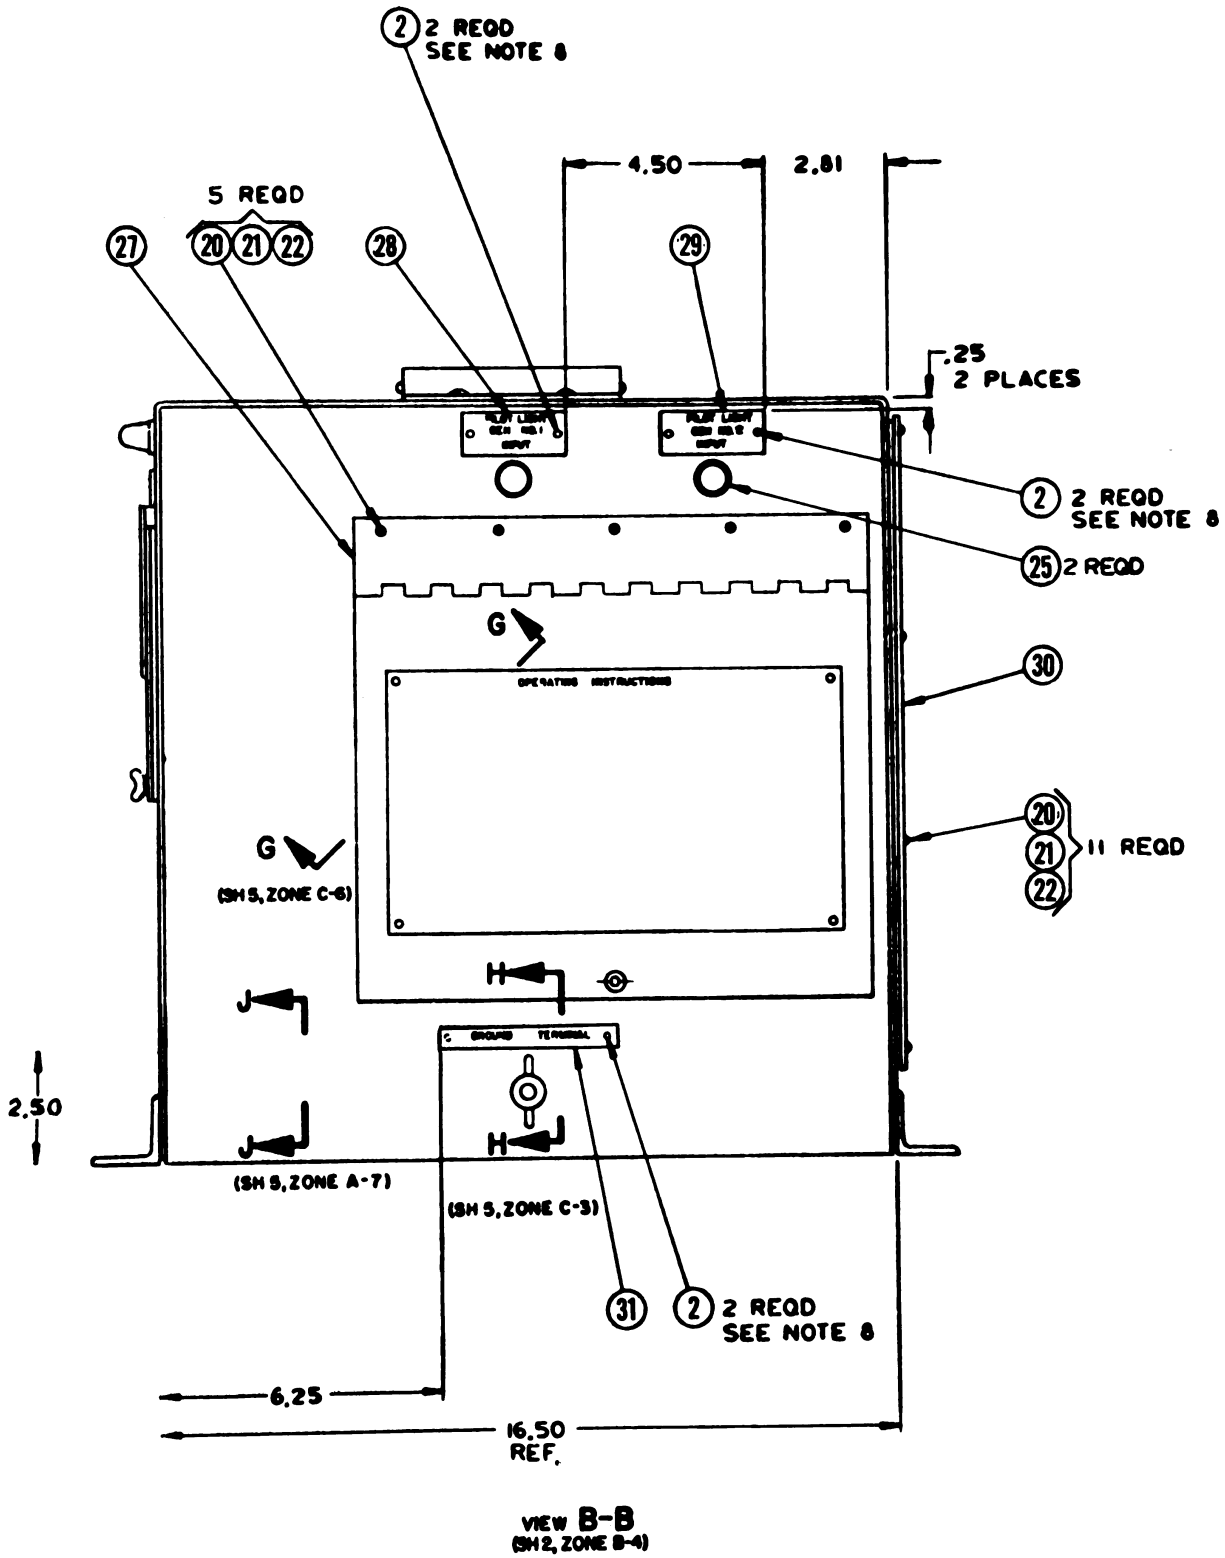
Switchbox Assembly (Sheet 3 of 7)
